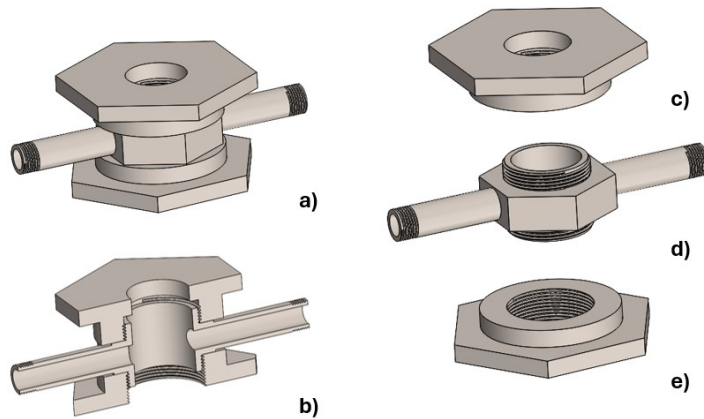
Representation of the cooling chamber and its components modelled in SolidWorks: (a) fully assembled cooling chamber; (b) sectional view, (c–e) perforated hexagonal head elements, and (d) central body of the jacket.
